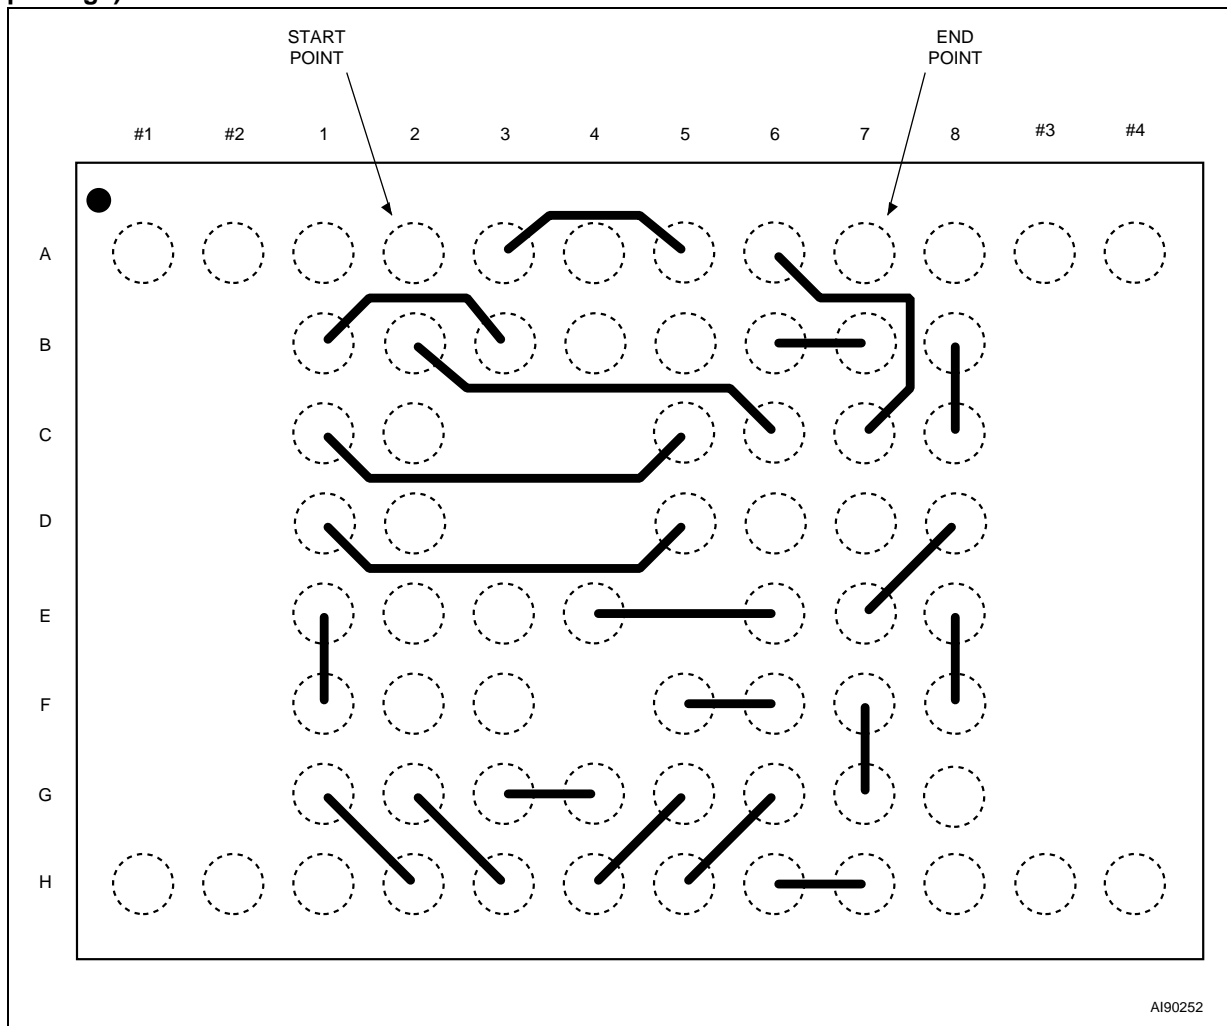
Stacked LFBGA66 Daisy Chain - PCB Connections proposal (Top view through package)
